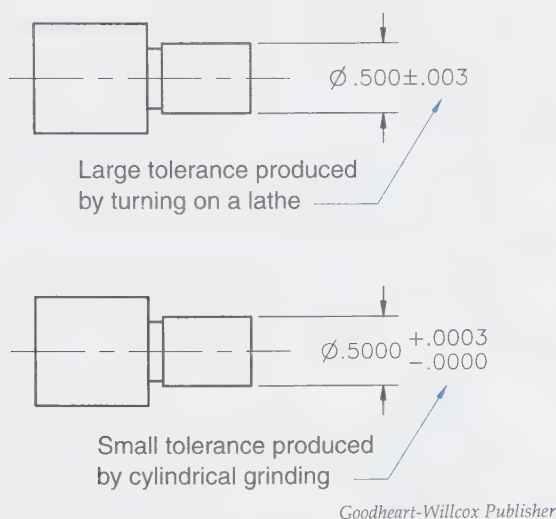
Machine capabilities must be considered when assigning tolerances.
